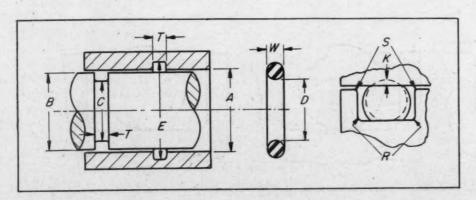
Left—Element designations used in formulas recommended for O-ring seal design
